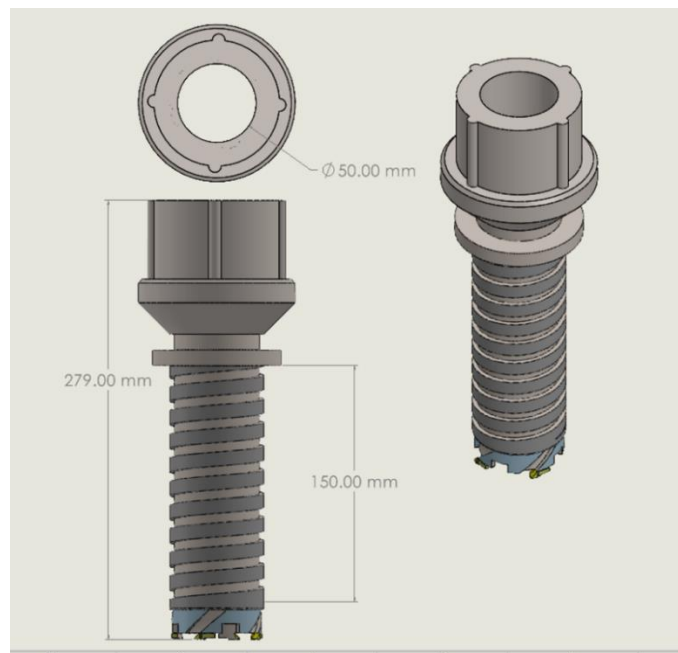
AISI 316 Annealed Stainless Steel Coring Drill Configuration
